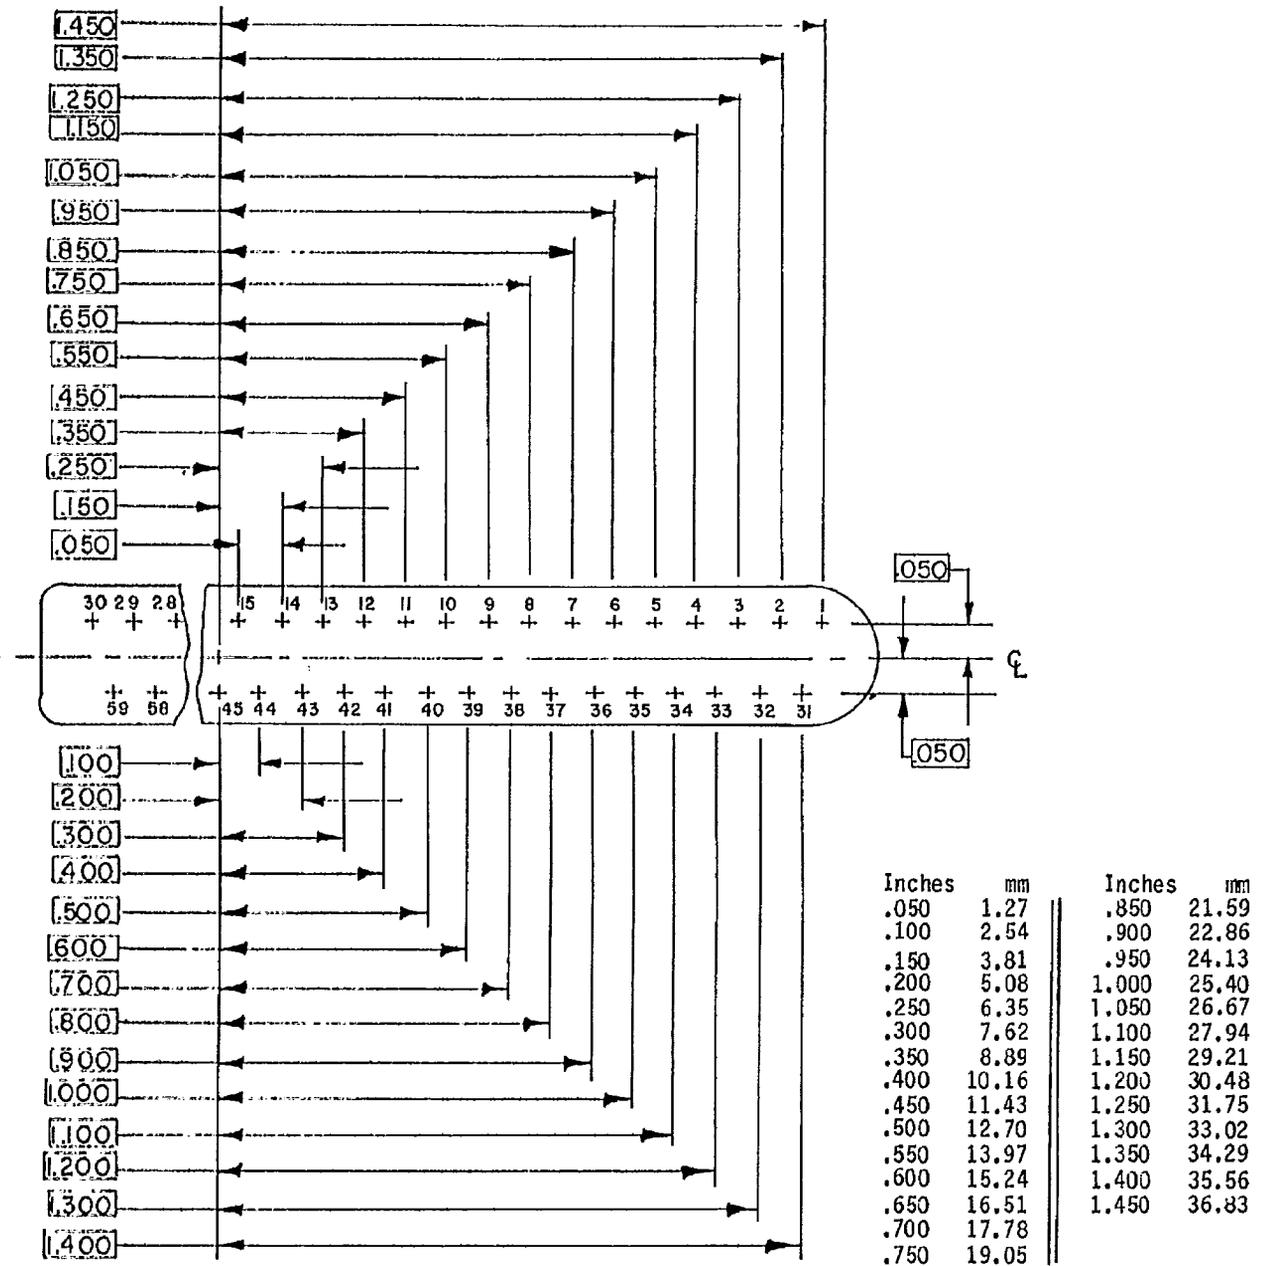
Connector, receptacle, .100 (2.54 mm) contact spacing, removable crimp terminal.
